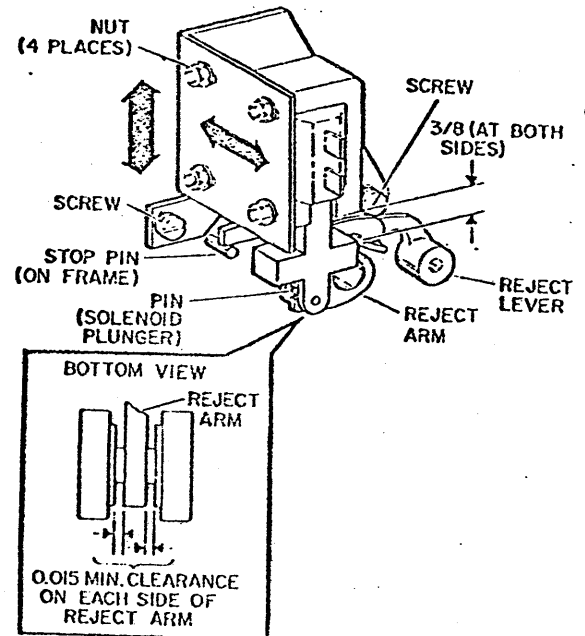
Reject Solenoid (L4) Assembly Adjustment
